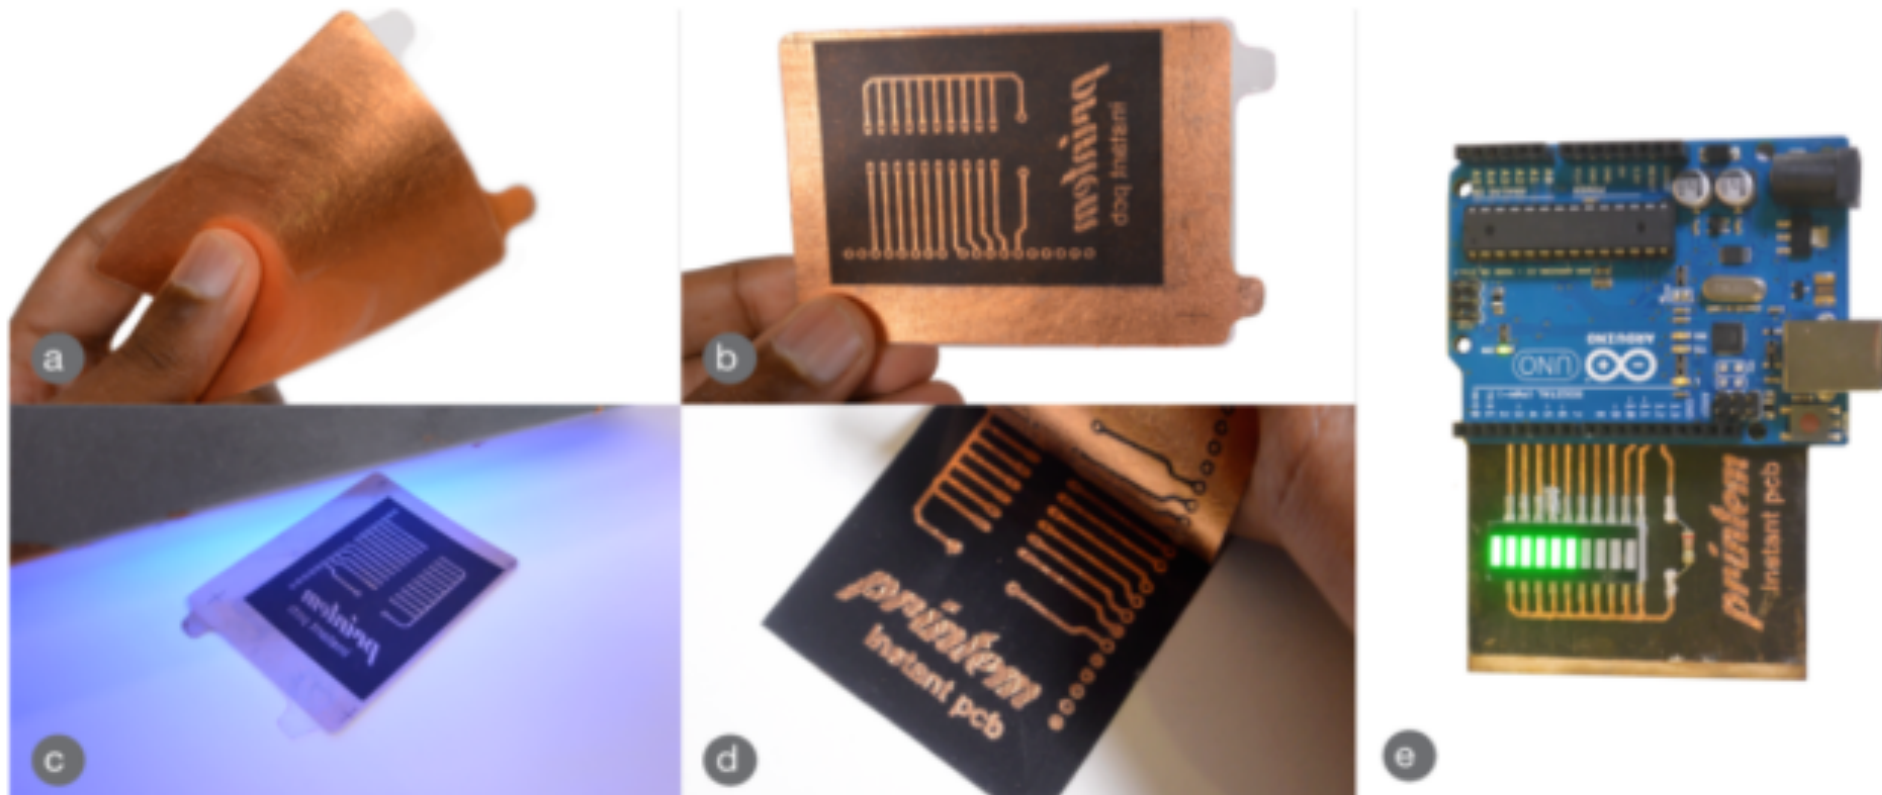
The use of Printem to instantly create a printed circuit board: (a) a blank Printem film; (b) a mask is printed; (c) the arrangement is exposed to UV or sunlight (d) top layer is removed, leaving behind a copper PCB; (e) components are added.
